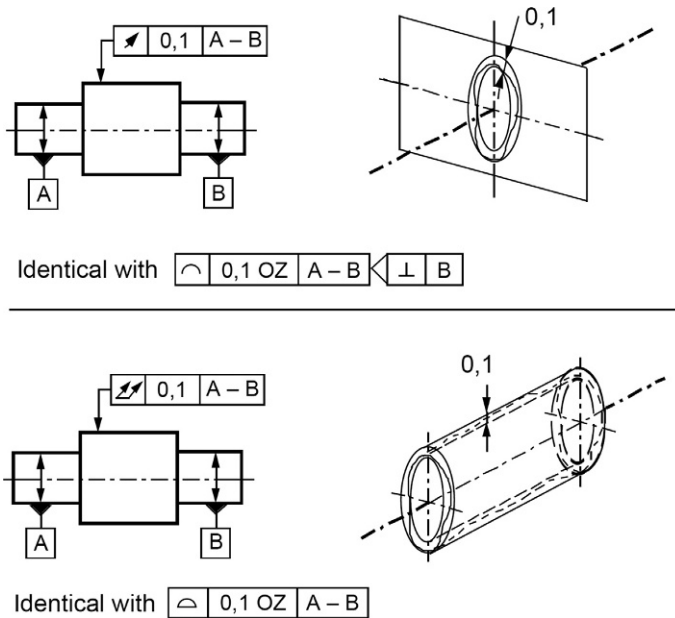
Circular radial run-out tolerance, total radial run-out tolerance
